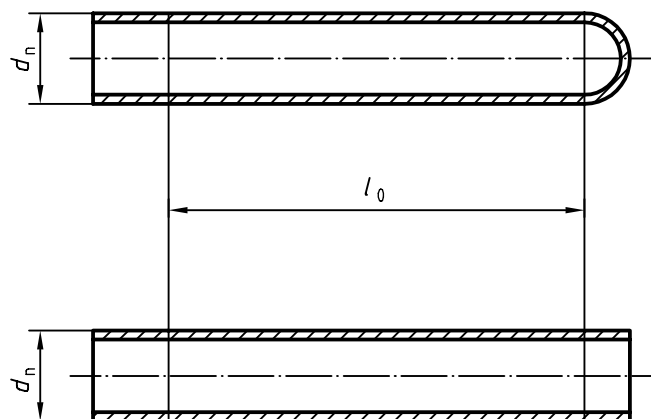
Test pieces produced by injection-moulding (upper test piece) and extrusion (lower test piece)
